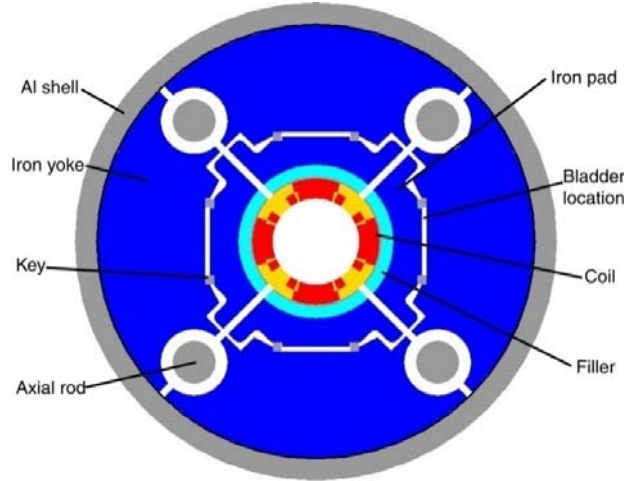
TQS magnet cross-section showing coils, fillers, pads, keys, yokes, shell and axial supporting rods.
